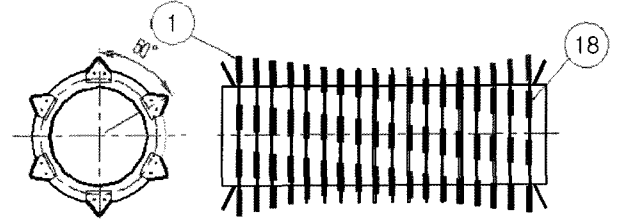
Spiral arrangement of six rotary blades per a flange.
